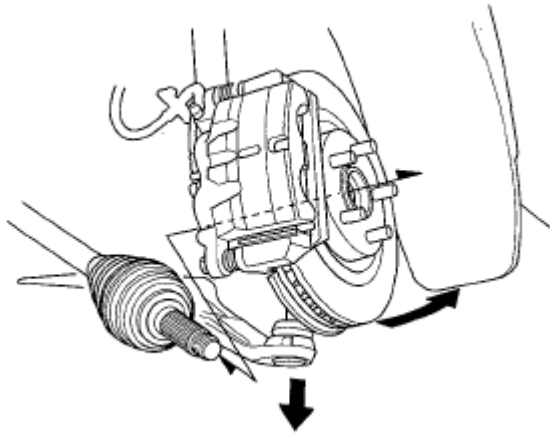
Identifying Driveshaft Outboard Joint From Front Wheel Hub
